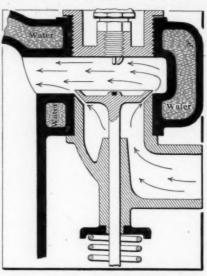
Design of valve having the advantages of the valve in the head without the location which is objected to
